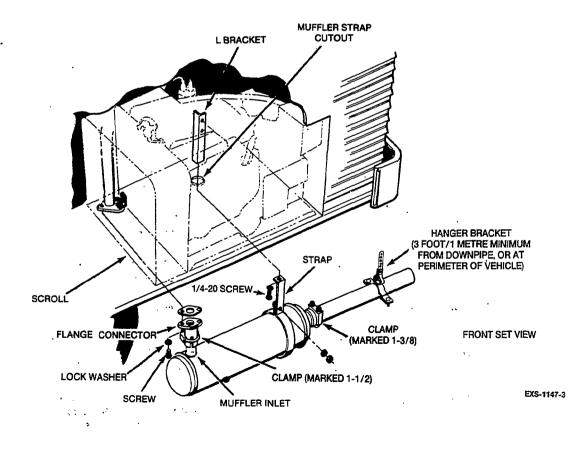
CONVENTIONAL COMPARTMENT MOUNT EXHAUST SYSTEM
